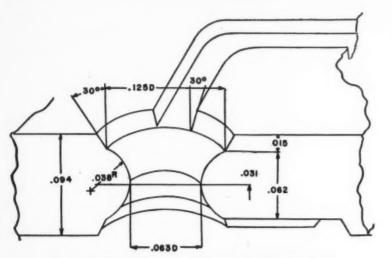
Typical cross section of 1/16" dia hourglass hole in a die-form panel. (Drawing courtesy Die-Form Circuits, Inc.)
